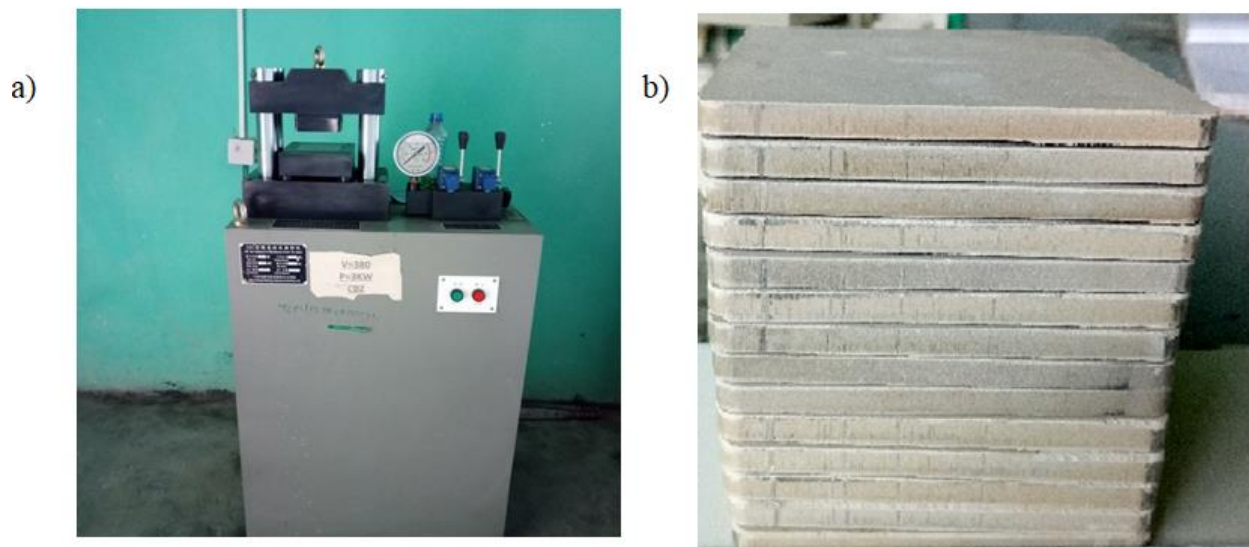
a) CBZ Type equipment for manufacturing Ceramic Tile Sample b) Pressured wall tiles.
